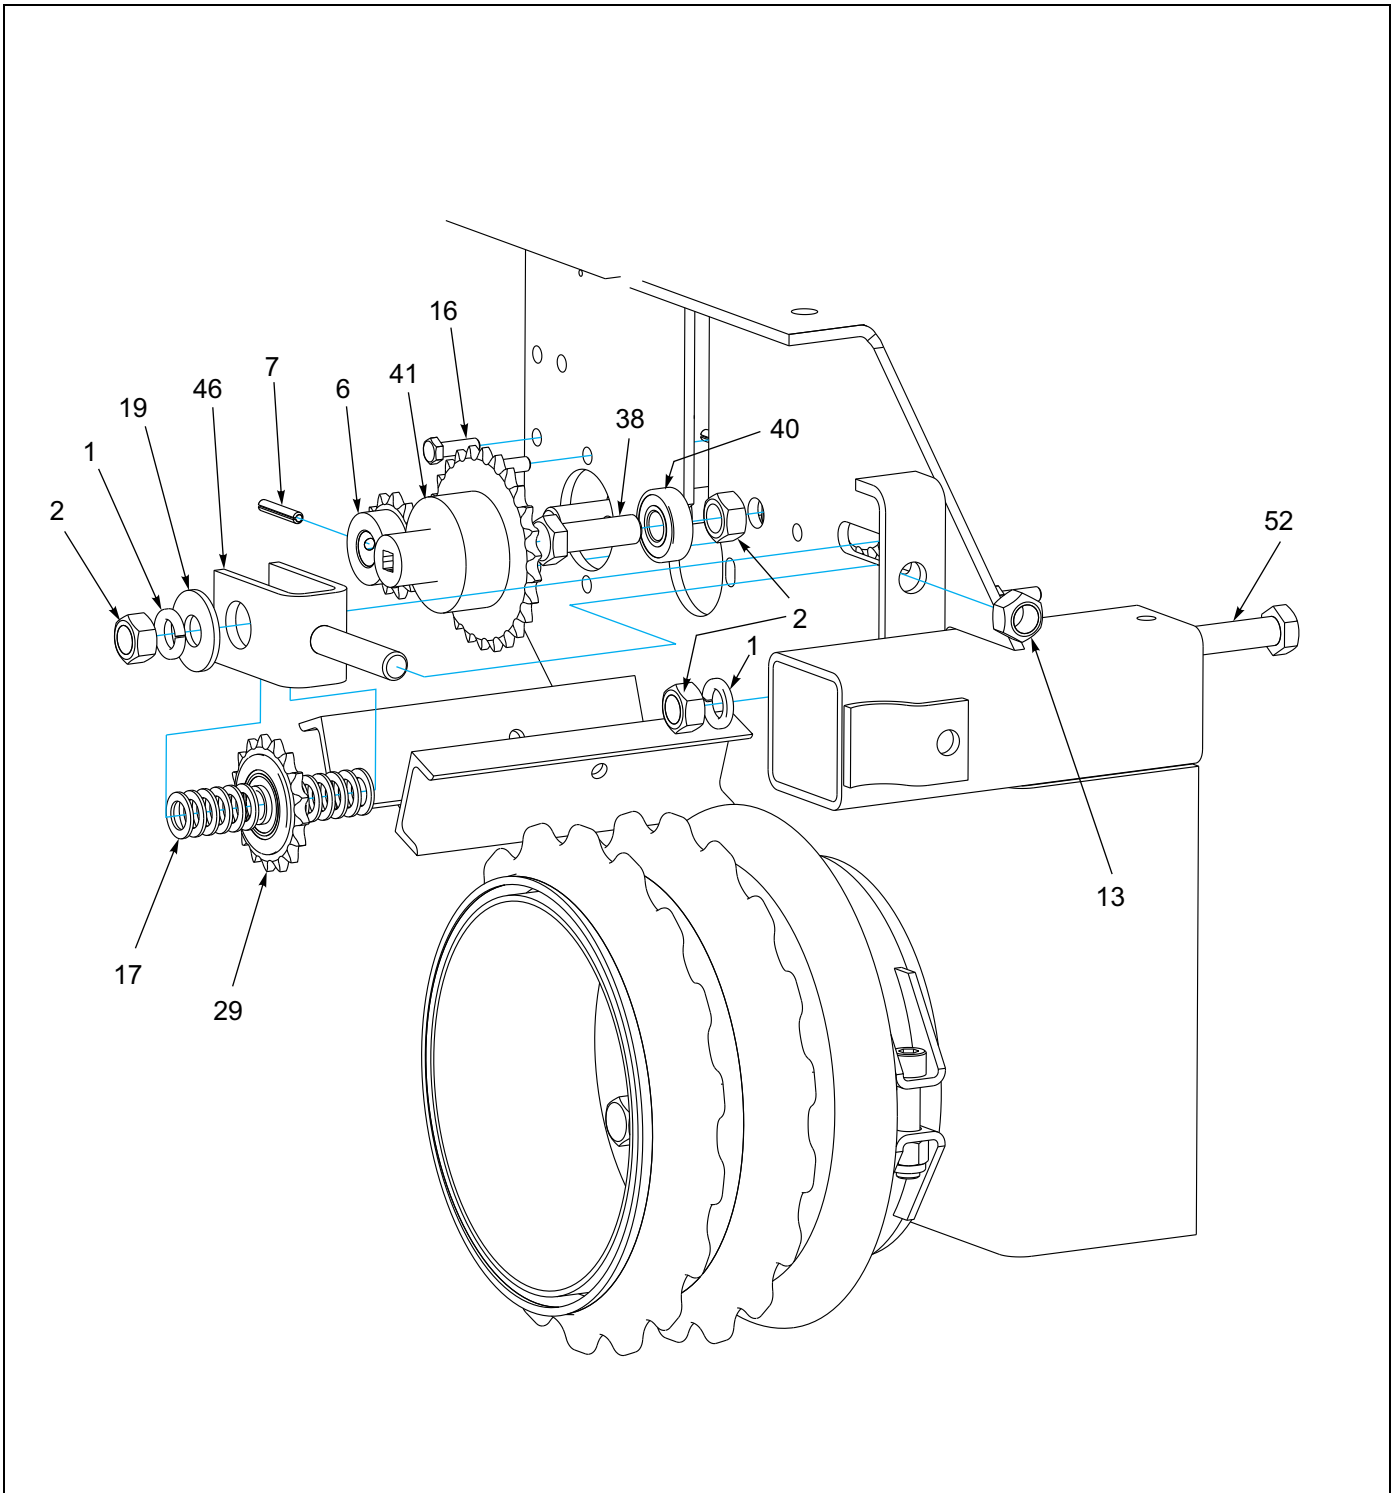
Drive Sprocket and Chain Assembly - 2 of 2
